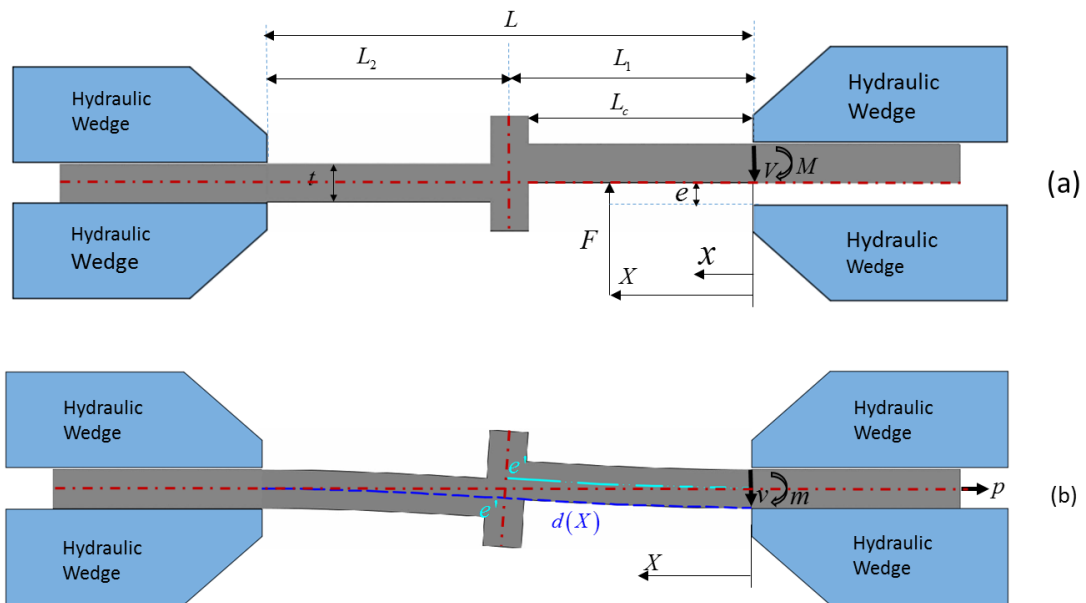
Cruciform joint with axial misalignment: (a) dimensions and shape before clamping; (b) deformed shape after clamping
